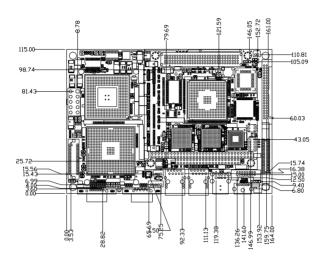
PCM-4386 Mechanical Drawing (Component Side)
